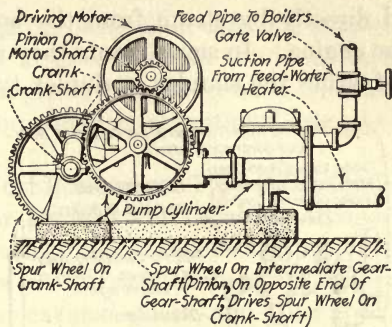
Driving Motor Geared To Boiler-Feed Pump.
